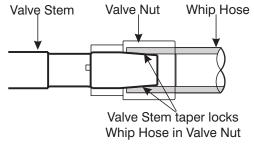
Valve Nut Secured to Valve Stem and Whip Hose
